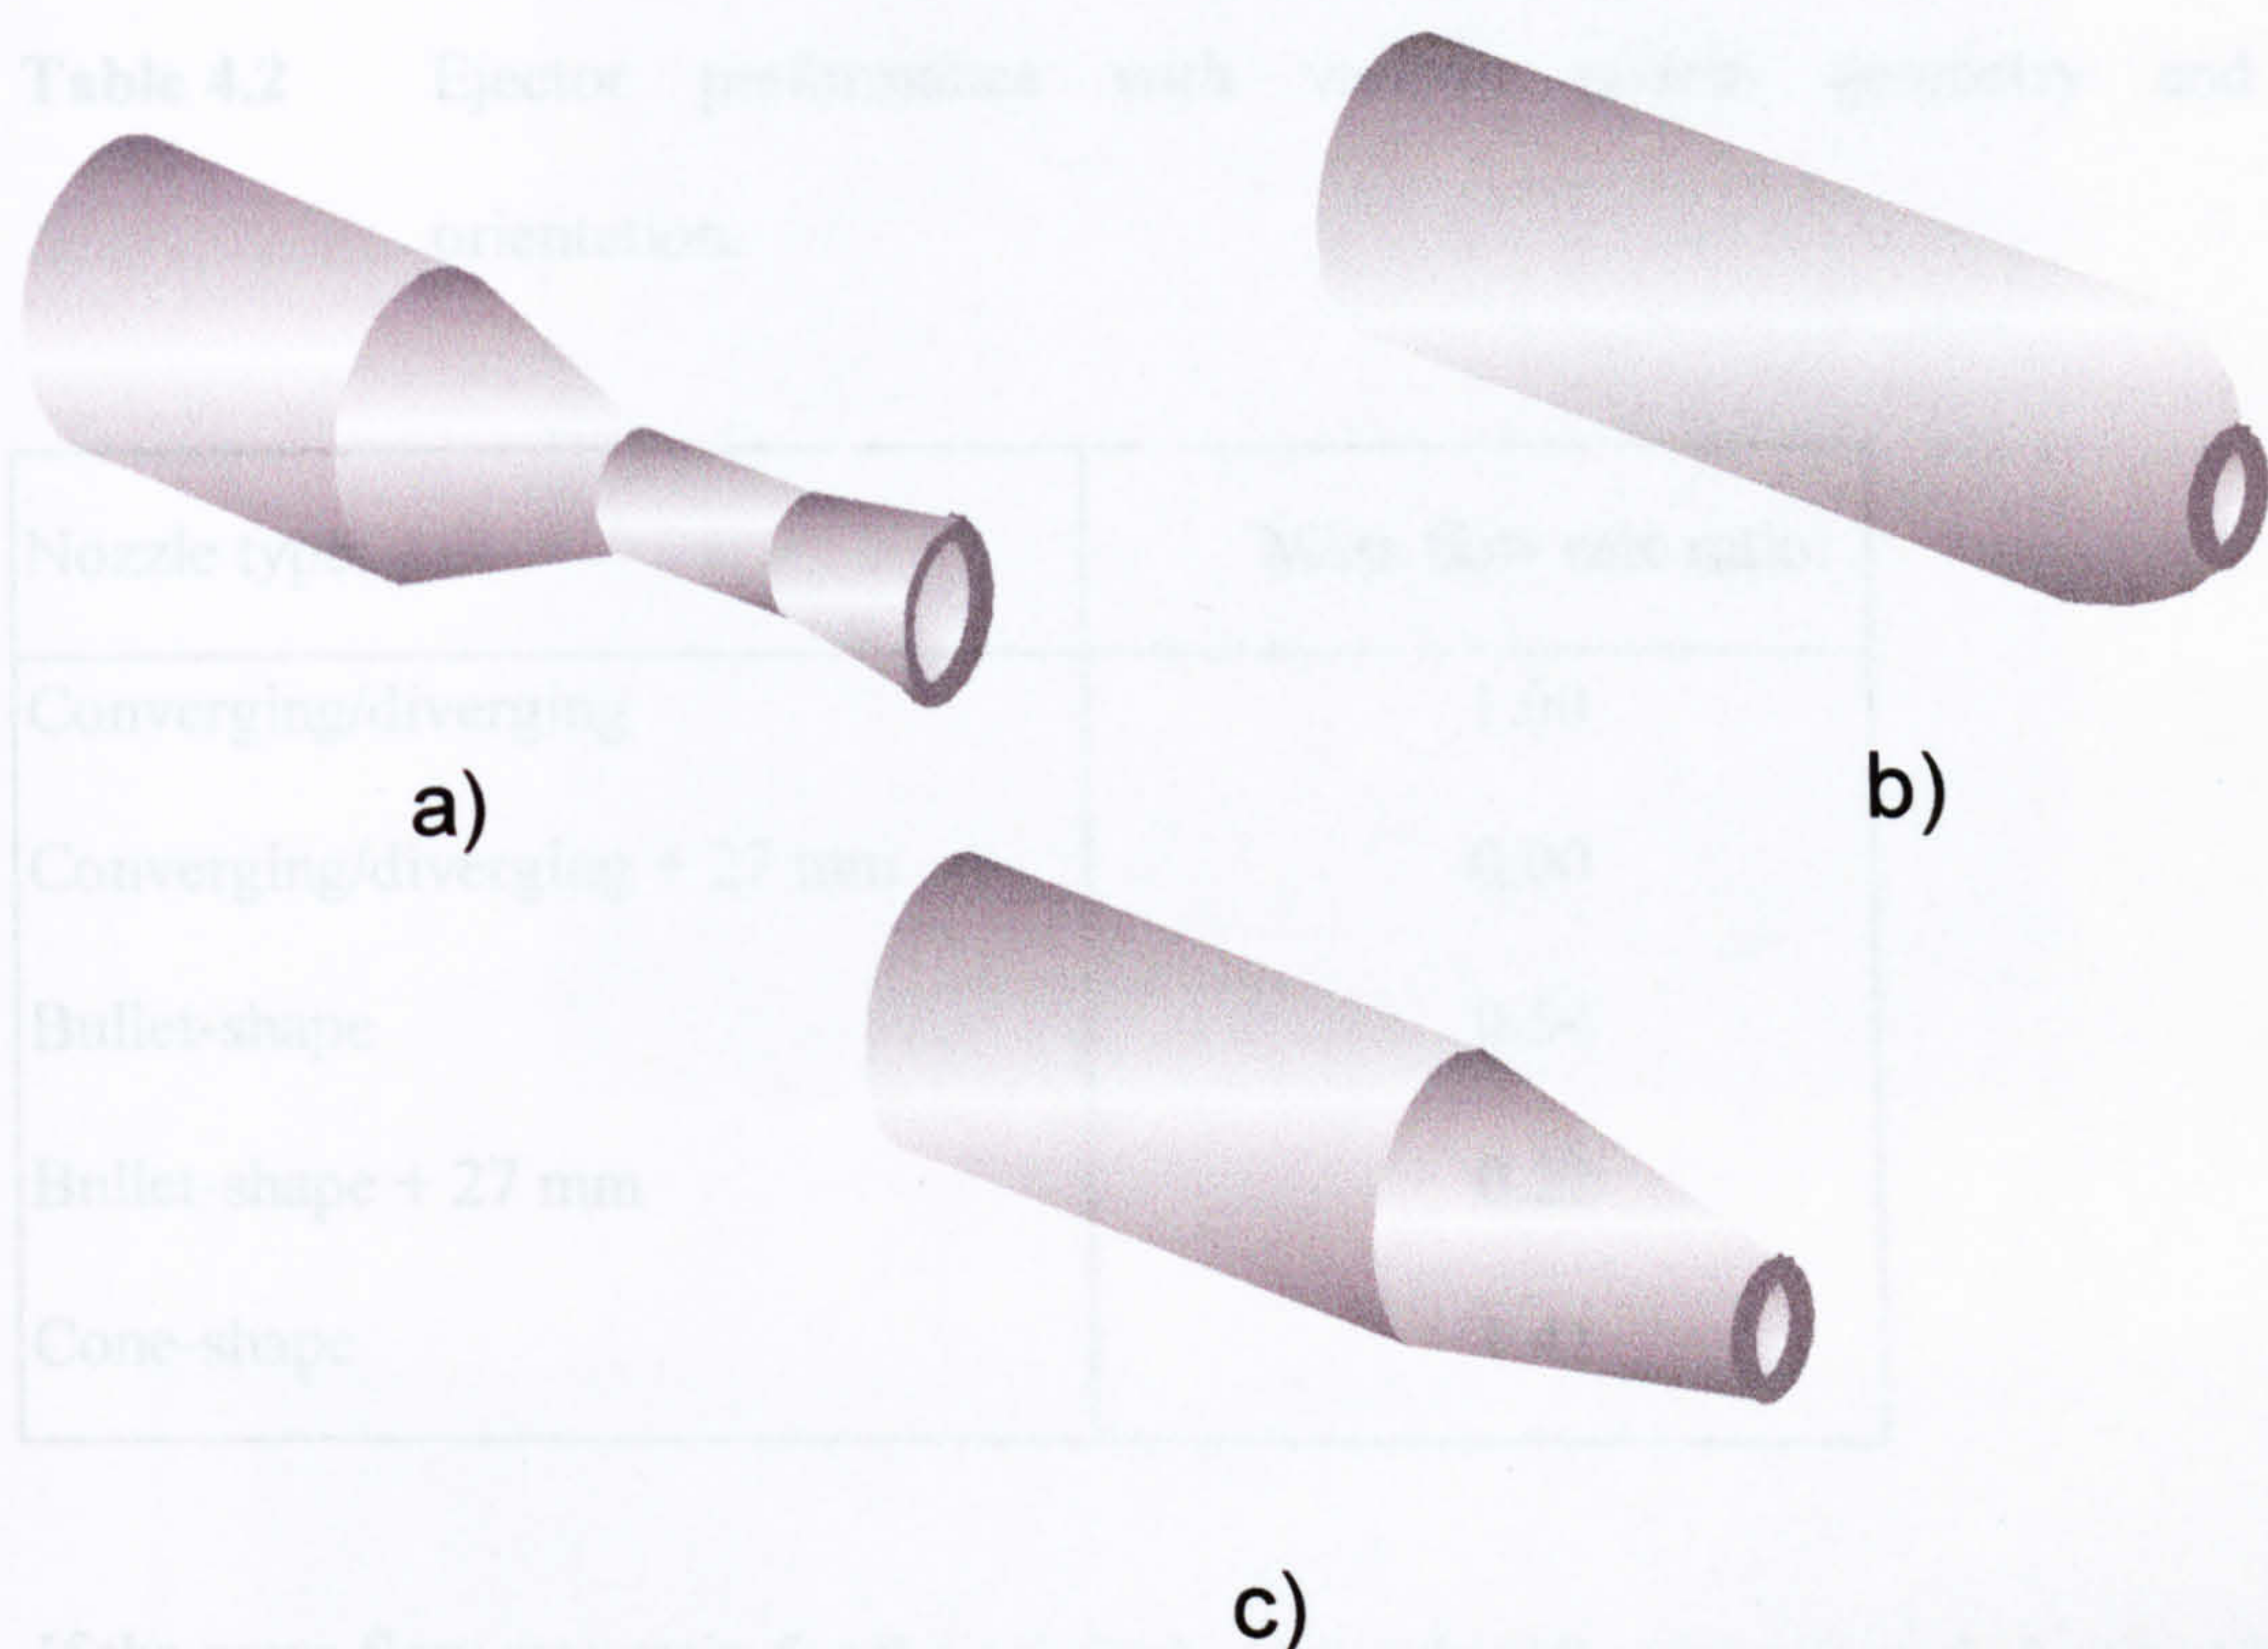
Nozzle types a) Converging/diverging, b) Bullet-shape and c) Cone-shape.
